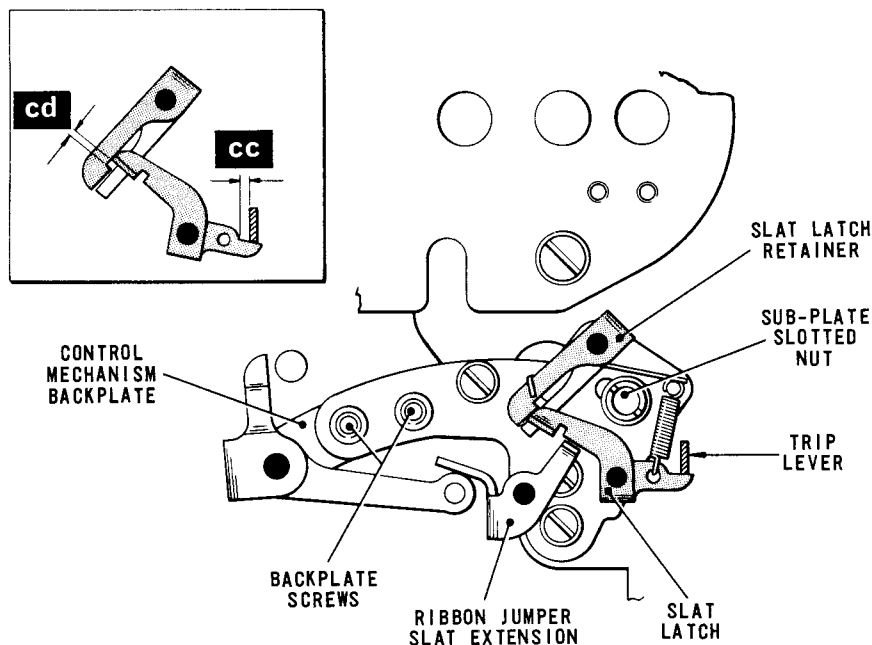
TWO-COLOUR PRINTING—LATCH MECHANISM
